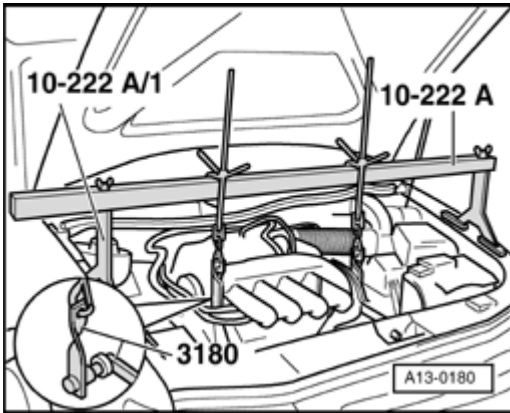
Setting Up Engine Support 10-222A On Two Wing Panel Flanges And Set Up With Supports 10-222A/1 And Two Spindles
